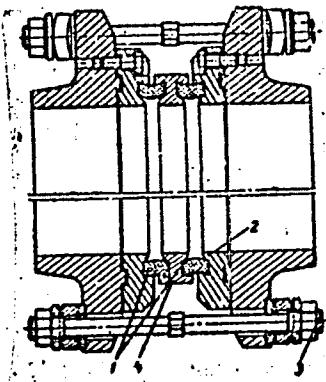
1 - elastic rubber elements; 2 - flange; 3 - coupling; 4 - floating ring.
